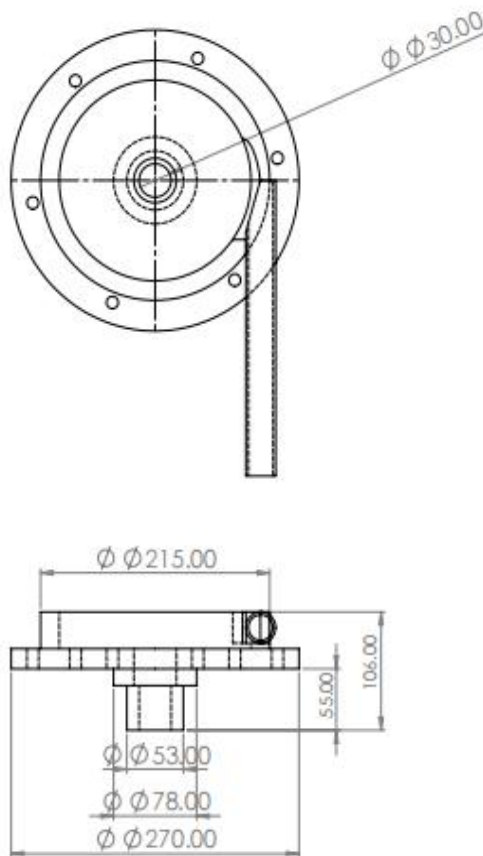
Side and plan view of the impeller casing which has the discharge outlet
